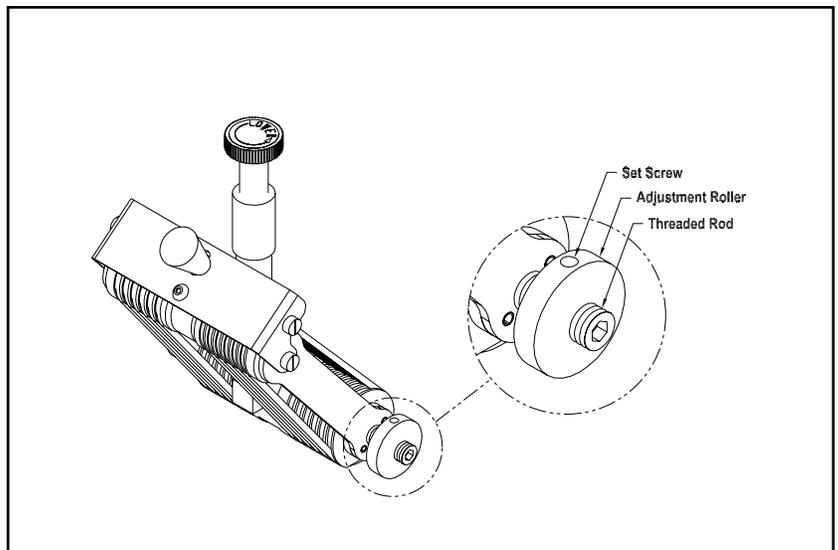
Horizon Adjustment Mechanism (shown on Advancing O-Ring Gate)
